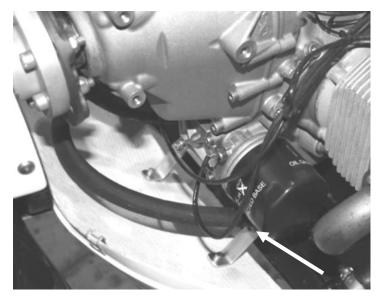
hose should be pulled forwards with cabletie and short standoff in position indicated to provide good clearance from fretting on engine
